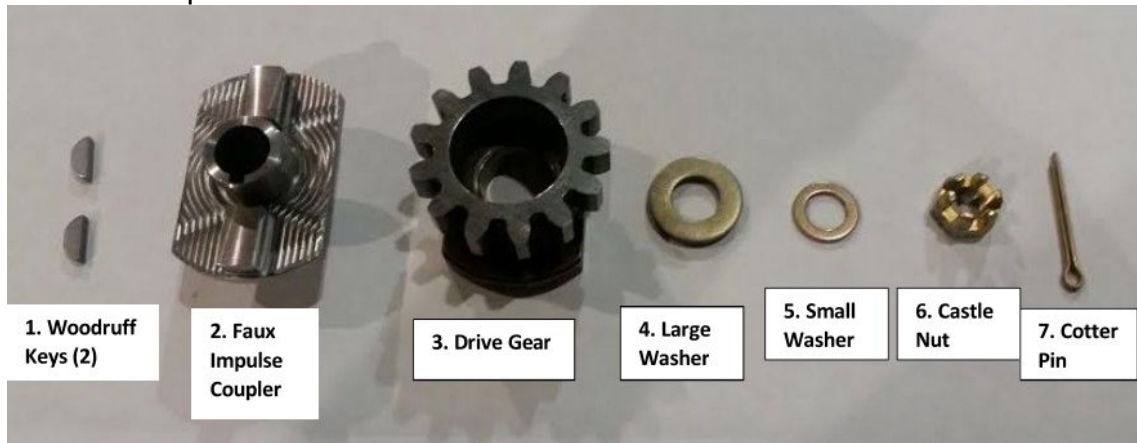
Install Order of Components to Impulse Coupled Shaft.
